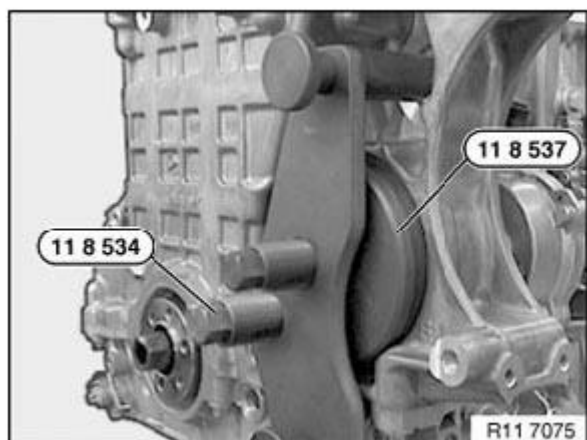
Identifying Special Tools (11 8 537, 11 8 534)
